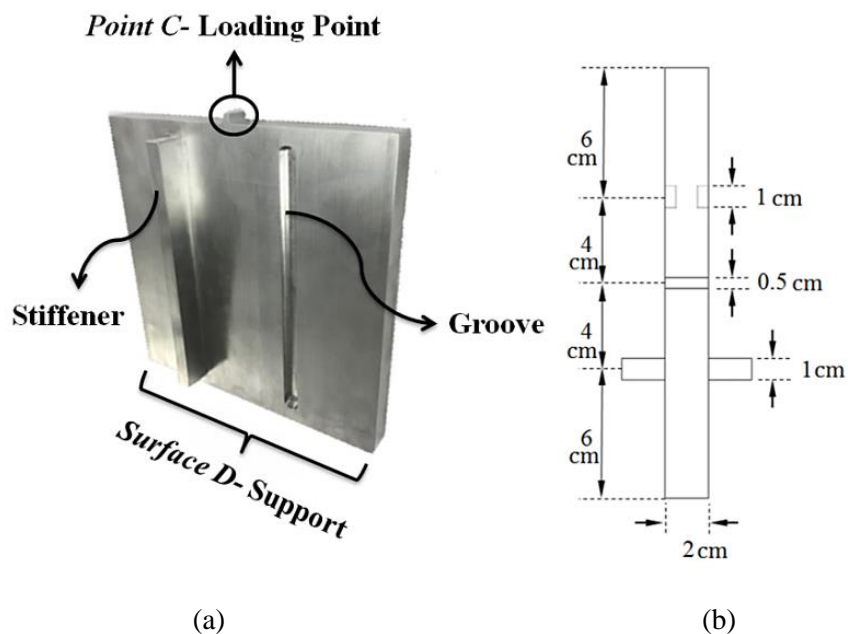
Design of the testing specimen- a): The testing specimen; b): The top view of the experimental model.
